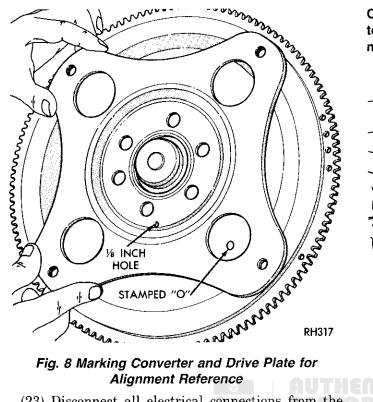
Marking Converter and Drive Plate for Alignment Reference
